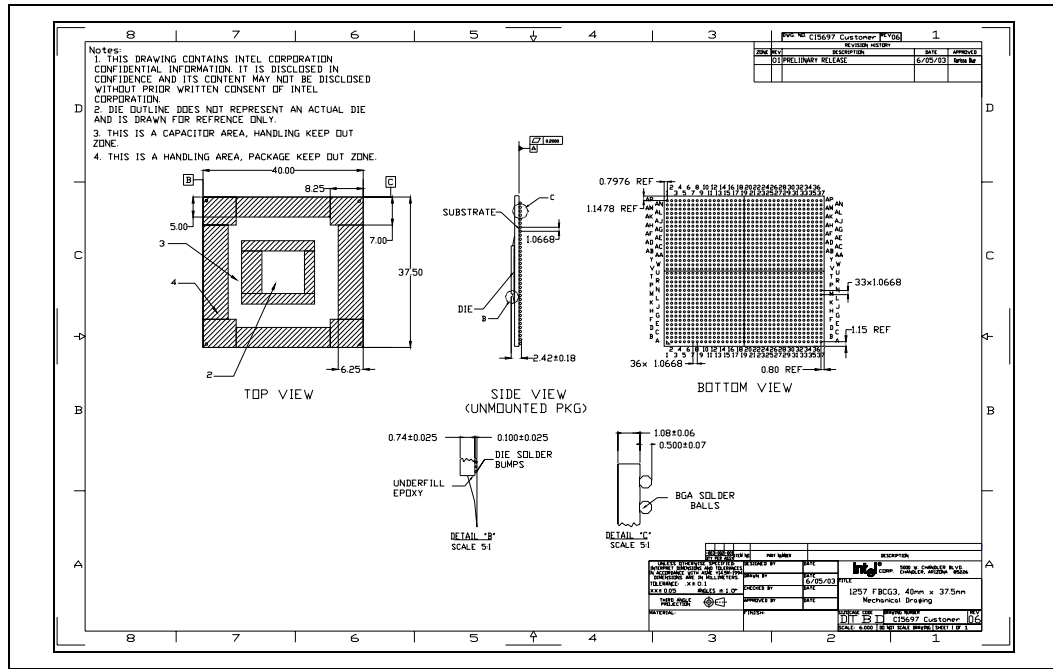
Mobile Intel 915PM/GM/GME/GL and 910GML Express Chipset Package Ball Grid Array
